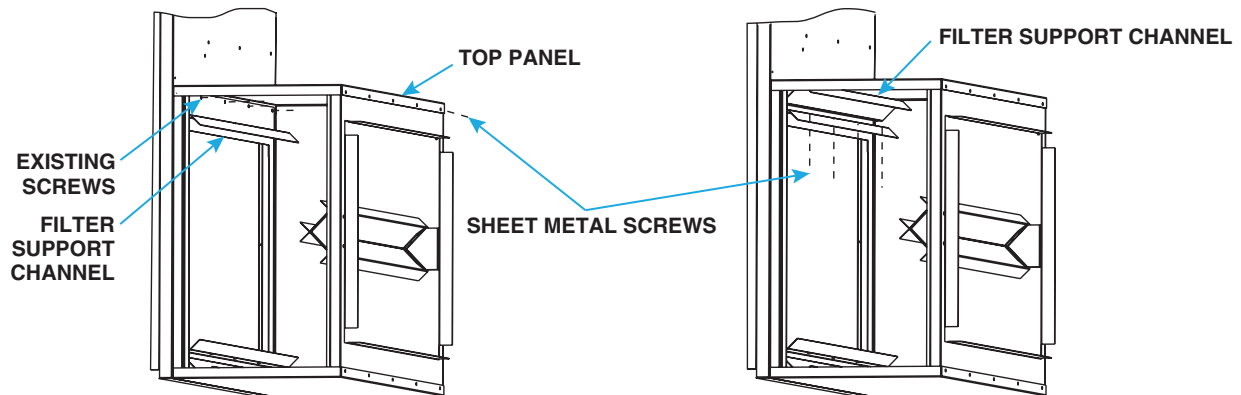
Install Rear Inlet Filter Cabinet on Heater
